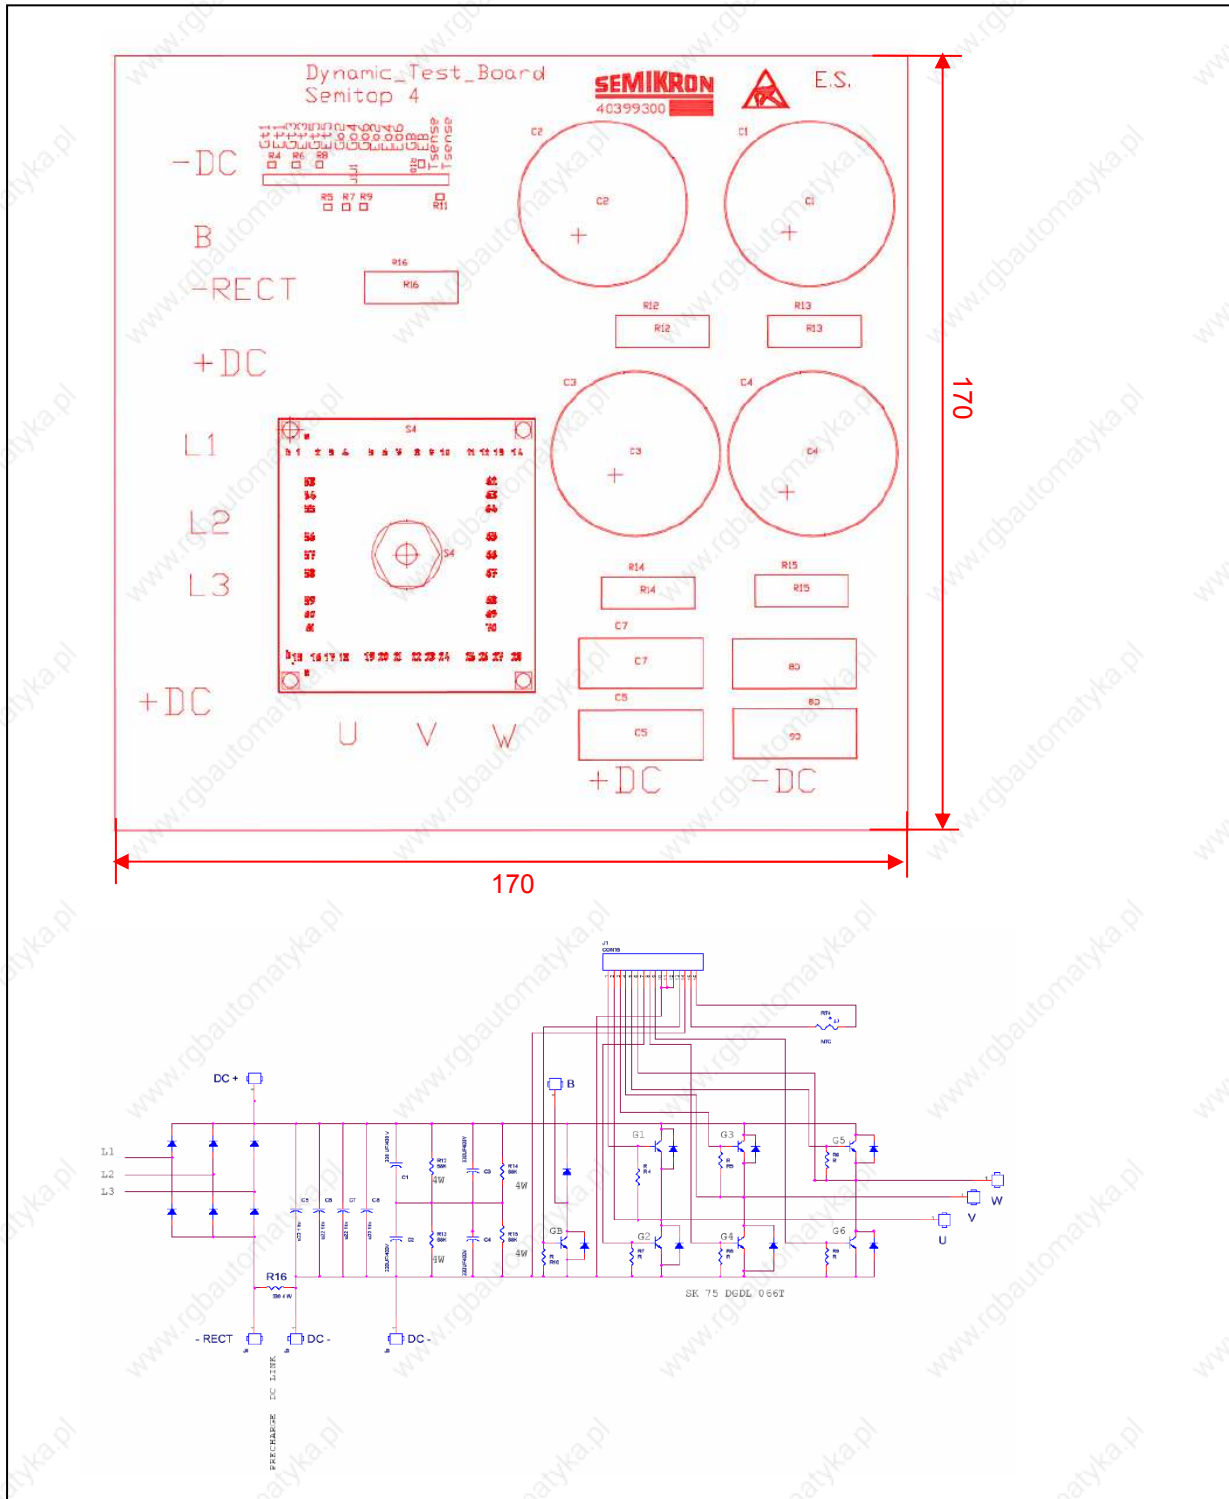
Demo PCB for DGDL topology: outer dimensions and schematic
